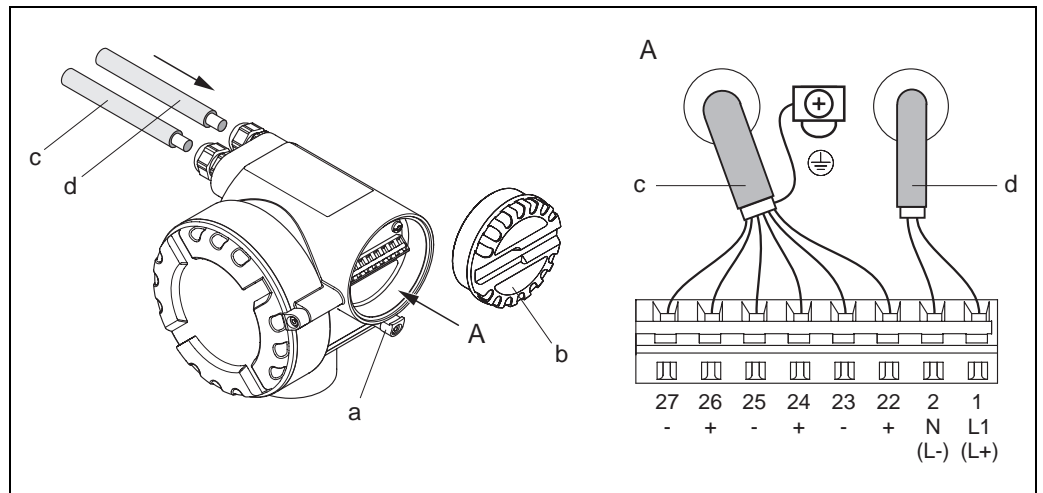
Connecting the transmitter, cable cross-section: max. 2.5 mm² (14 AWG)
